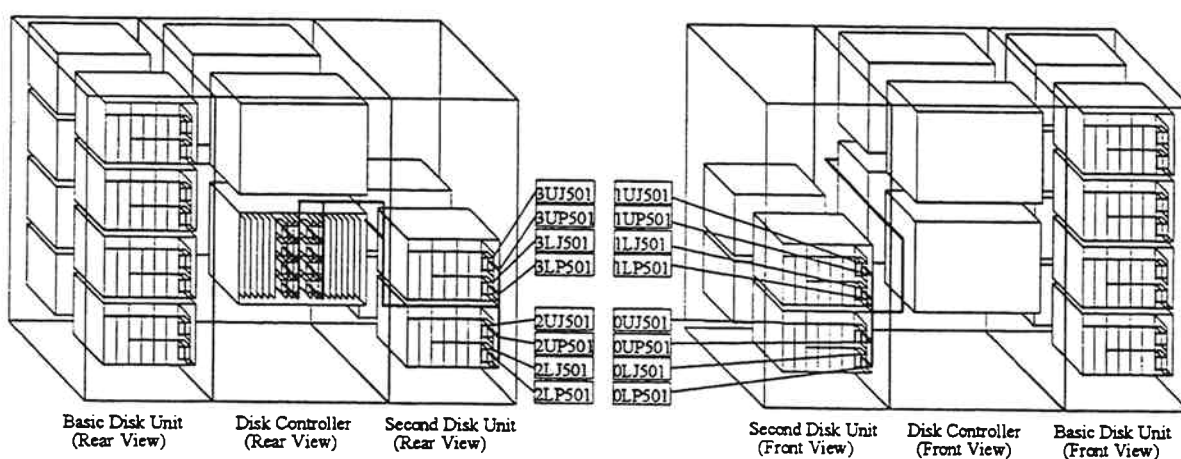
SCSI Interface Cable Disconnecting Diagram (SCSI BFR PCB Side)
